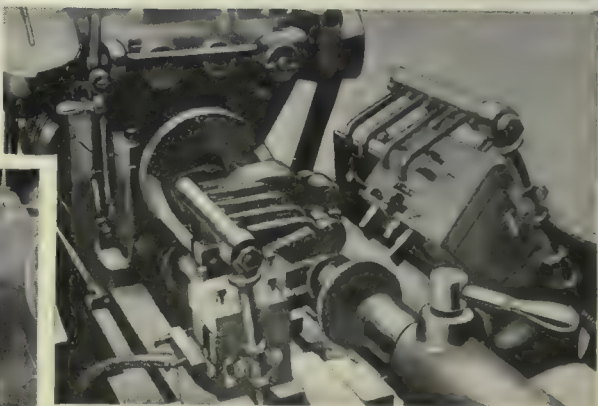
Turning ends of crankshafts on Fay automatic lathes. Two machines are used, tooled to turn opposite ends. One man runs them both. This crankshaft has main bearings 2 in. in diameter and a flange 5 in. in diameter at the end. The throw is for a 5-in. stroke. The production runs from 20 to 25 shafts per hour, turned on both ends.
